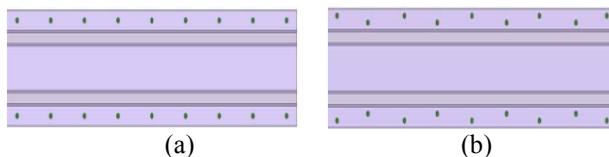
(a) Weld pattern P1 (b) Weld pattern P2 [2]
